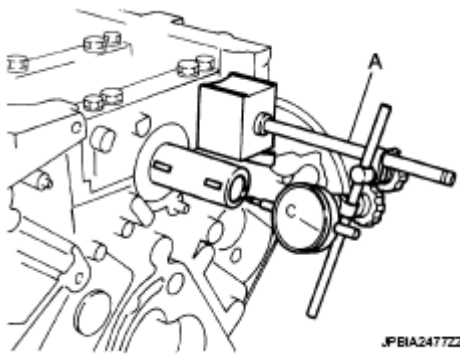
Measuring Clearance Between Thrust Bearings And Crankshaft Arm
